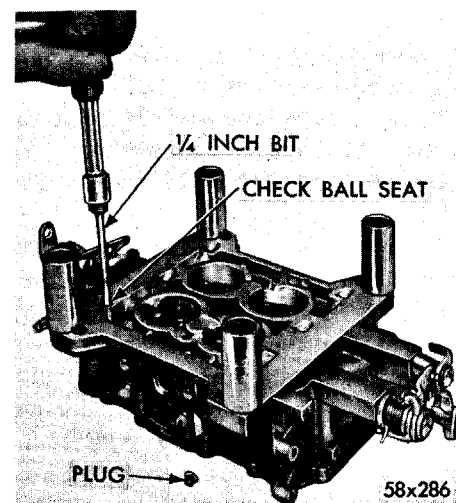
Removing or Installing Accelerator Pump Intake Check Ball Seat
